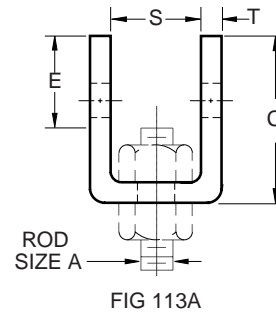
WELDED BEAM ATTACHMENT
